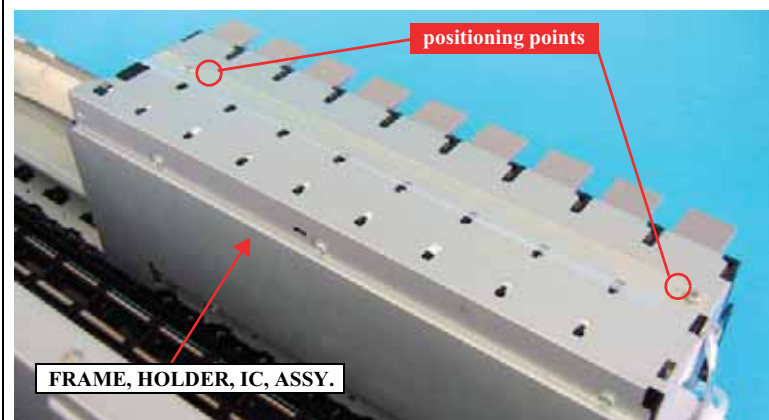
Removing the SHIELD PLATE, HOLDER, ASSY.
